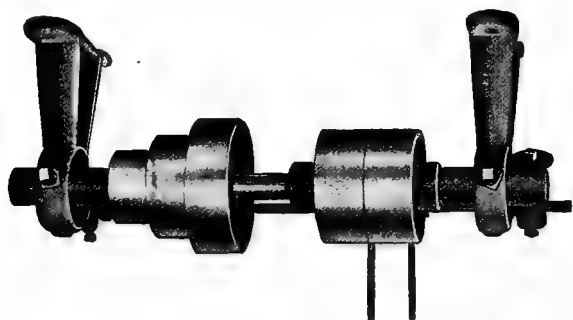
Countershaft Assembly With Tight, Loose and Stepped Pulleys.
